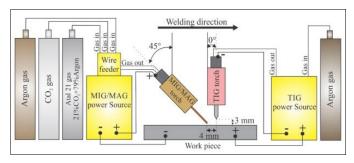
Schematic diagram of TIG-MIG/MAG hybrid welding.
